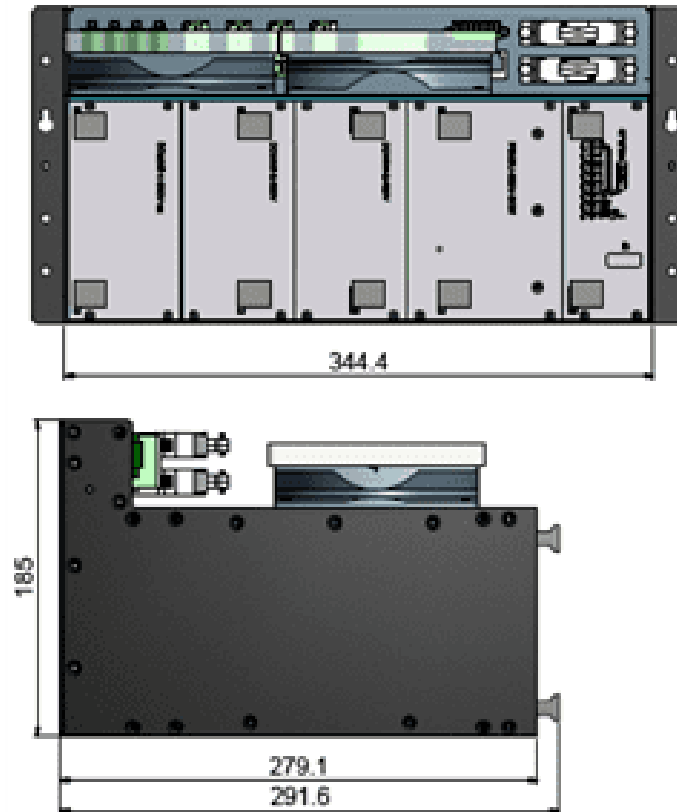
MC4U-13-Piano-AX7 Dimensions
